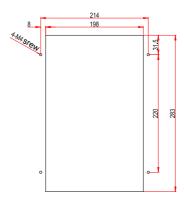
Dimensions of through hole mounting bracket and hole of MD500ET15GB
